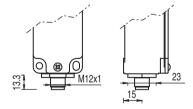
Dimensions of S300-P13C1-M12-xxx in mm (M12 plug dimensions)
